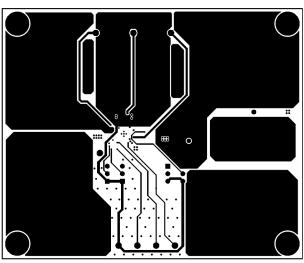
LM74912Q1EVM Board Inner Layer 2
